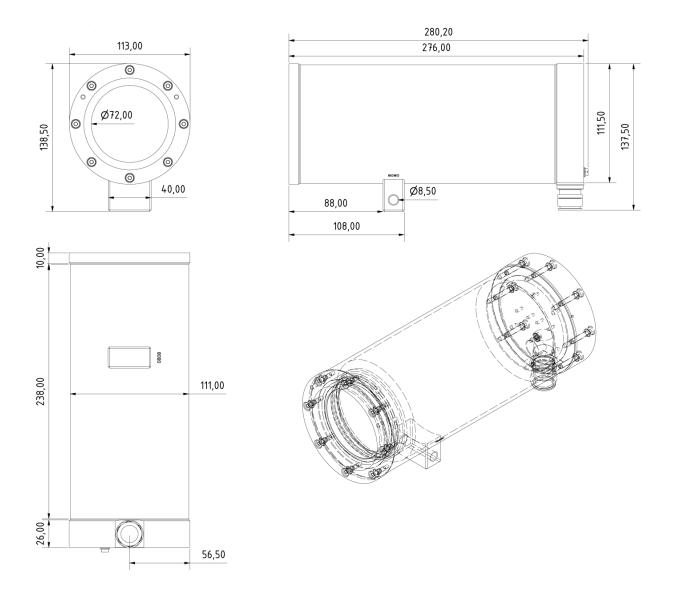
Dimensions of the T08 ExCam IP135x with K2 flange
